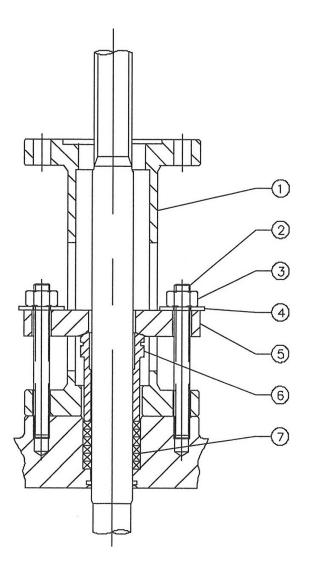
Outside Packing Gland (OPG) Stem Seal Arrangement
